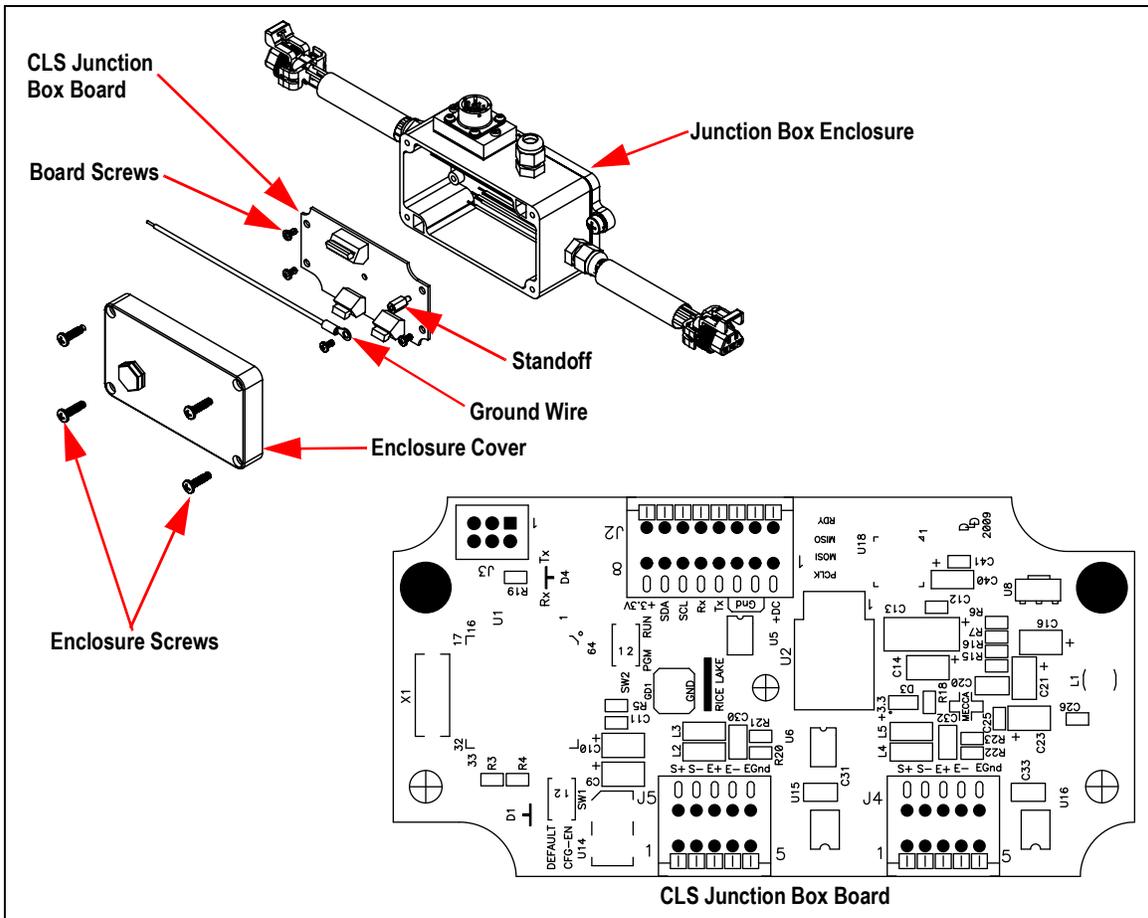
Board Removal and Wiring – Quick Connect Style
